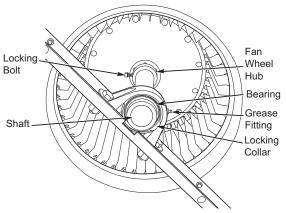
Fan Shaft, Bearings, and Fan Wheel (Typical) Centering Fan Wheel
